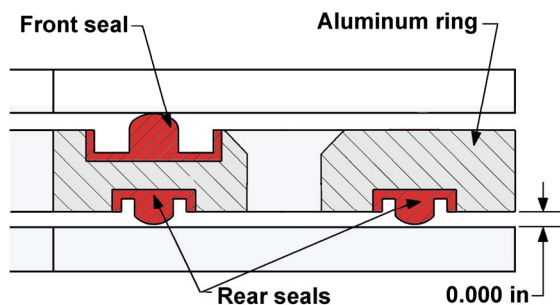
Illustration of the cross-section of a 12"CBM test specimen having one front-side and two rear-side elastomer seals in the aluminum ring.
